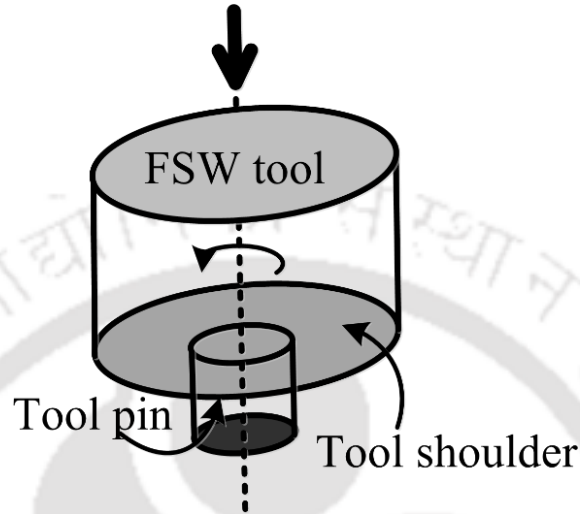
Cylindrical threaded pin type probe FSW tool.
